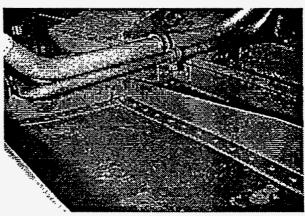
Inside view (looking aft) from the FLIR showing wheel well fairing skin and supporting structure.
